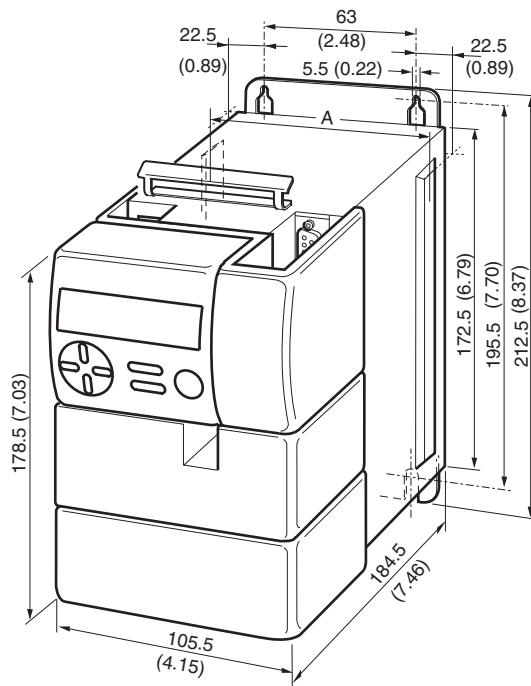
Dimensions TLC5112 and TLC5122 in mm (in.).
